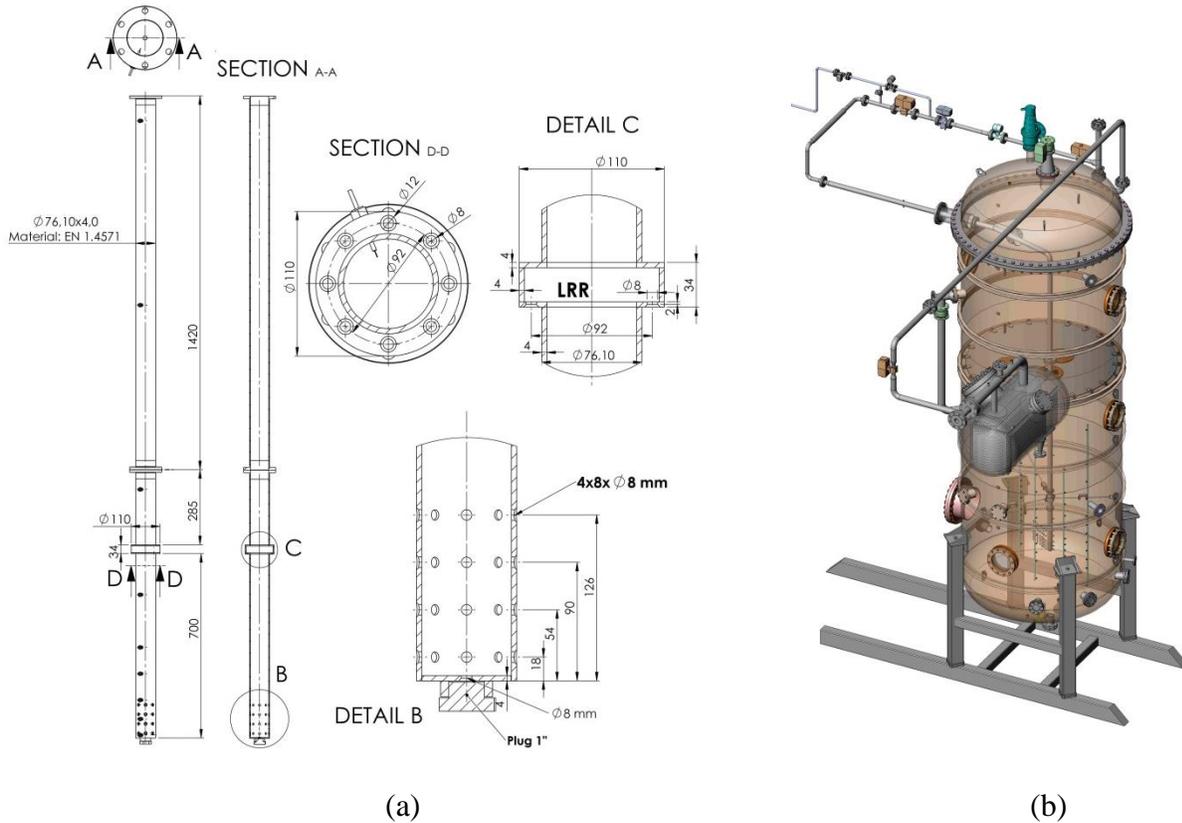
Design of the experimental setup obtained with the scaling. Drawings courtesy of operators at PPOOLEX facility, LUT, Finland [11]. (a) Sparger design used in the PPOOLEX-SPA tests. (b) General-view of the PPOOLEX vessel and steam generator.
